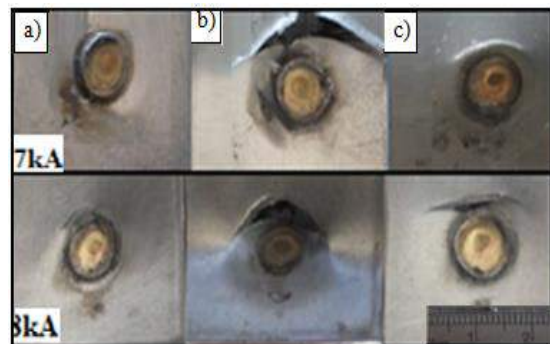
Fracture surfaces AR samples joined with various welding time a) 15 cycles, b) 20 cycles, c) 25 cycles
